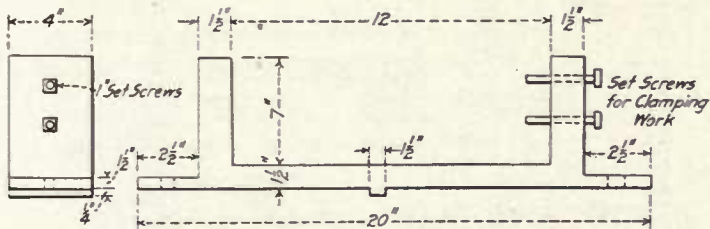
Adjustable Chuck for Horizontal Boring Mill.
